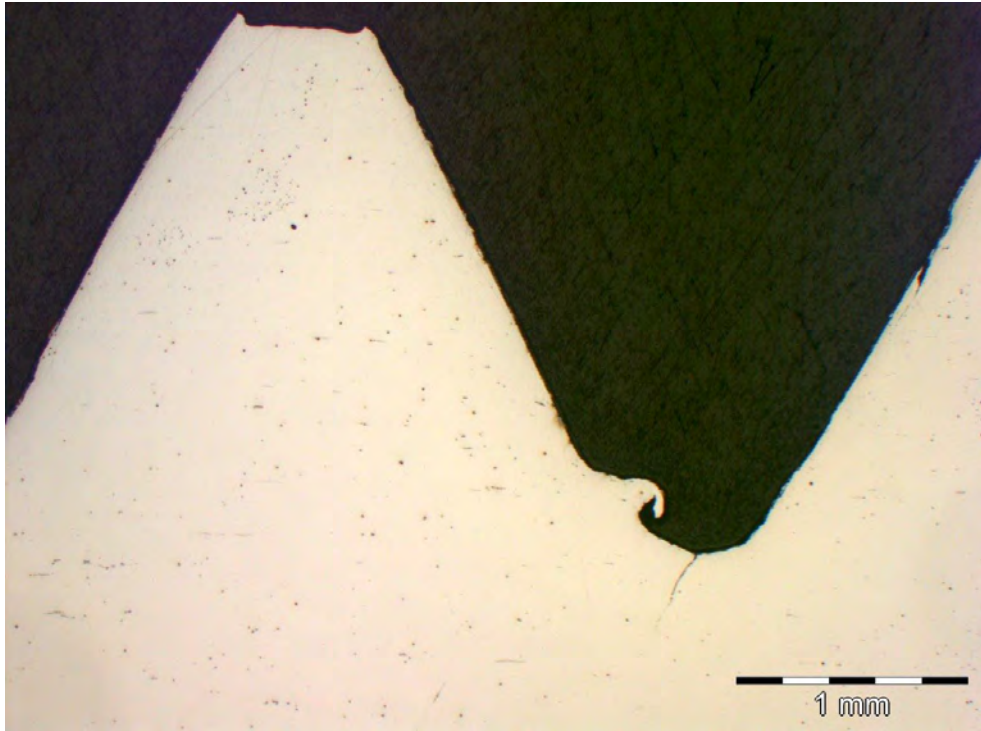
Large view of cut six in crack at segment C, second ridge on barrel no. 14389
